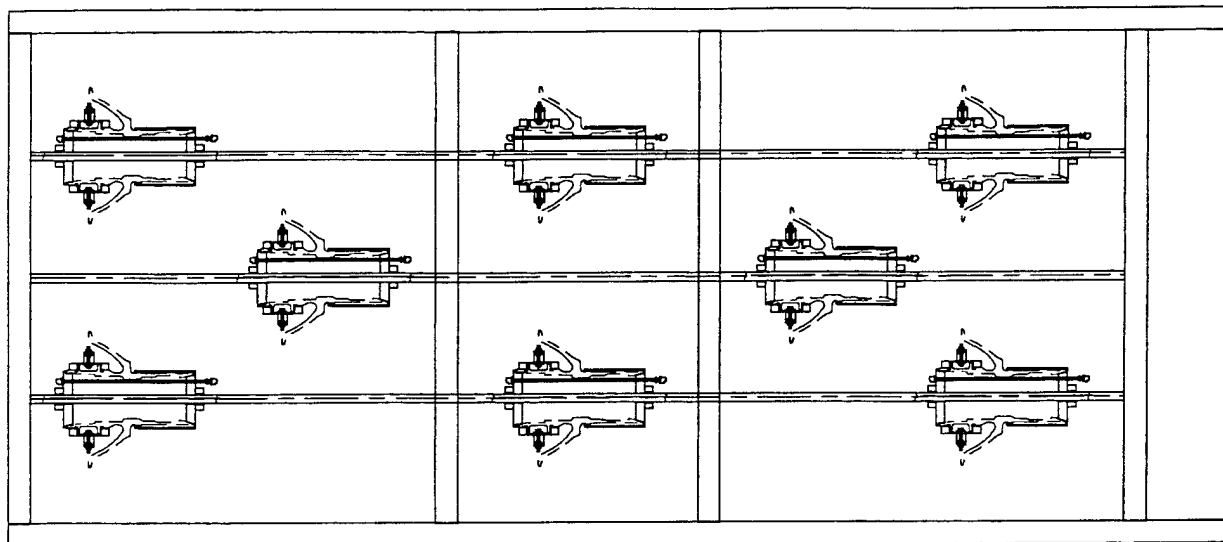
Concept for Installation of Eight C-130 Propeller Rear Barrel Halves on the Rotary Rack.
